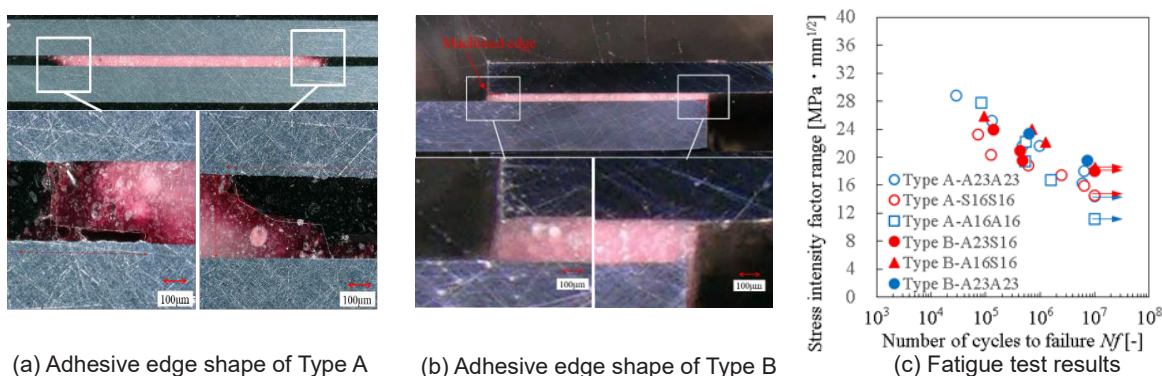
Adhesive edges of both Type specimen and the fatigue test results
